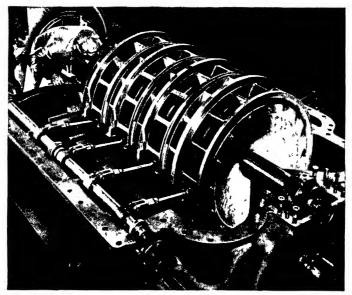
Prerotation-vane-operating mechanism on multistage machine. (Courtesy of Allis-Chalmers Manufacturing Co.)
